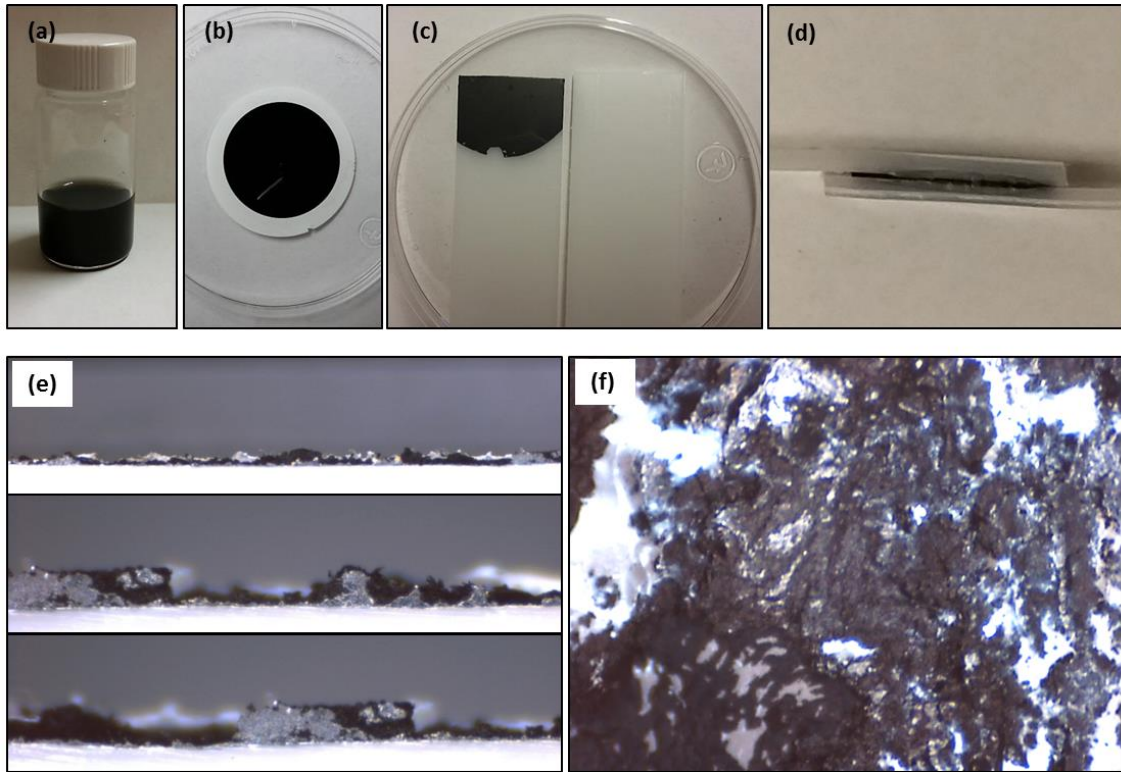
MMW of PE coupons using CNT buckypapers: optical image of (a) nanotube suspension, (b) filtered buckypaper, (c) and (d) the specimen before and after the MWW, (e) side-view and (f) top-view optical images of the specimen welded area after mechanical rupture in tensile testing.
